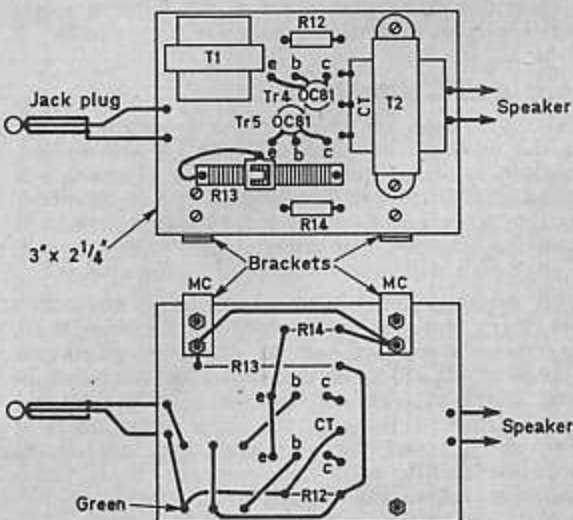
Views of amplifier circuit board. Care must be taken to ensure correct wiring of jackplug.
